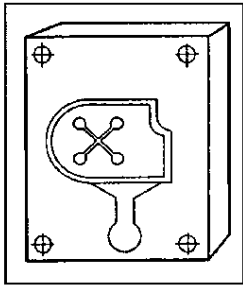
A single-cavity die casting tool (above) is often used for prototyping for very high-volume production and testing before a final set of multi-cavity dies is produced.
